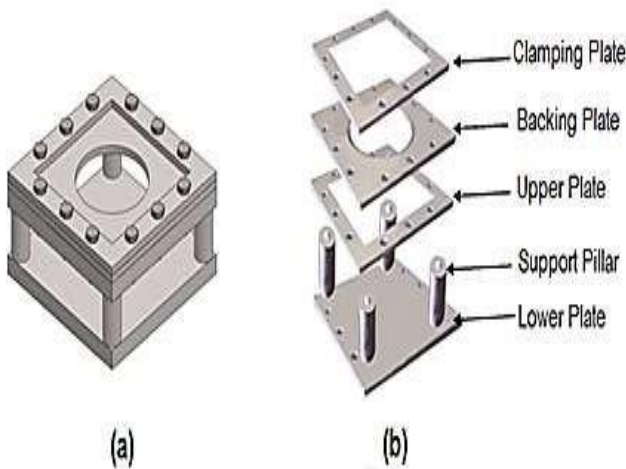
Clamping arrangement, a-Assembled b- Disassembled.
